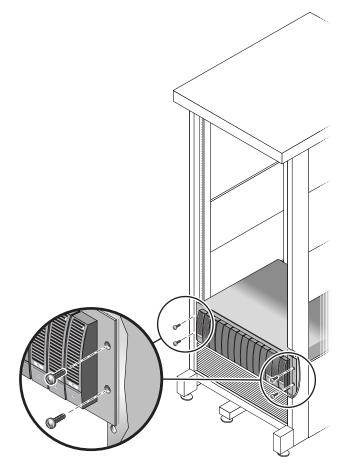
Securing the Array to the Front of a Sun Rack 900/1000 Cabinet
